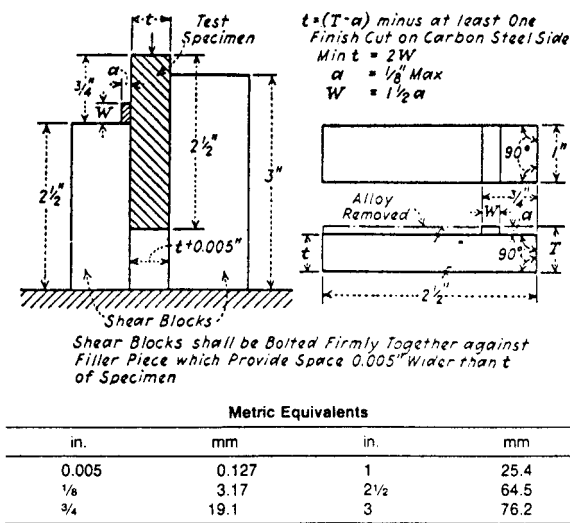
TEST SPECIMEN AND METHOD OF MAKING SHEAR TEST OF CLAD PLATE
